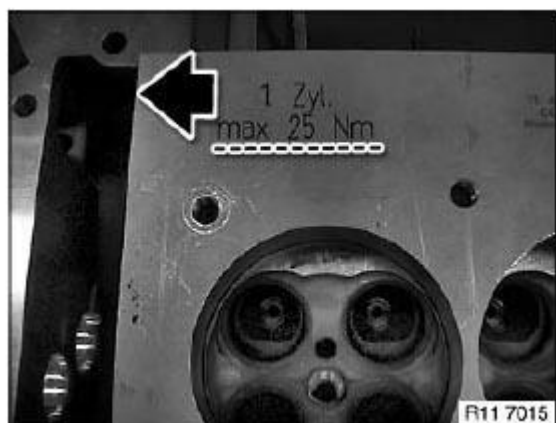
Securing Special Tool 11 4 341 With Bolts 11 4 345
